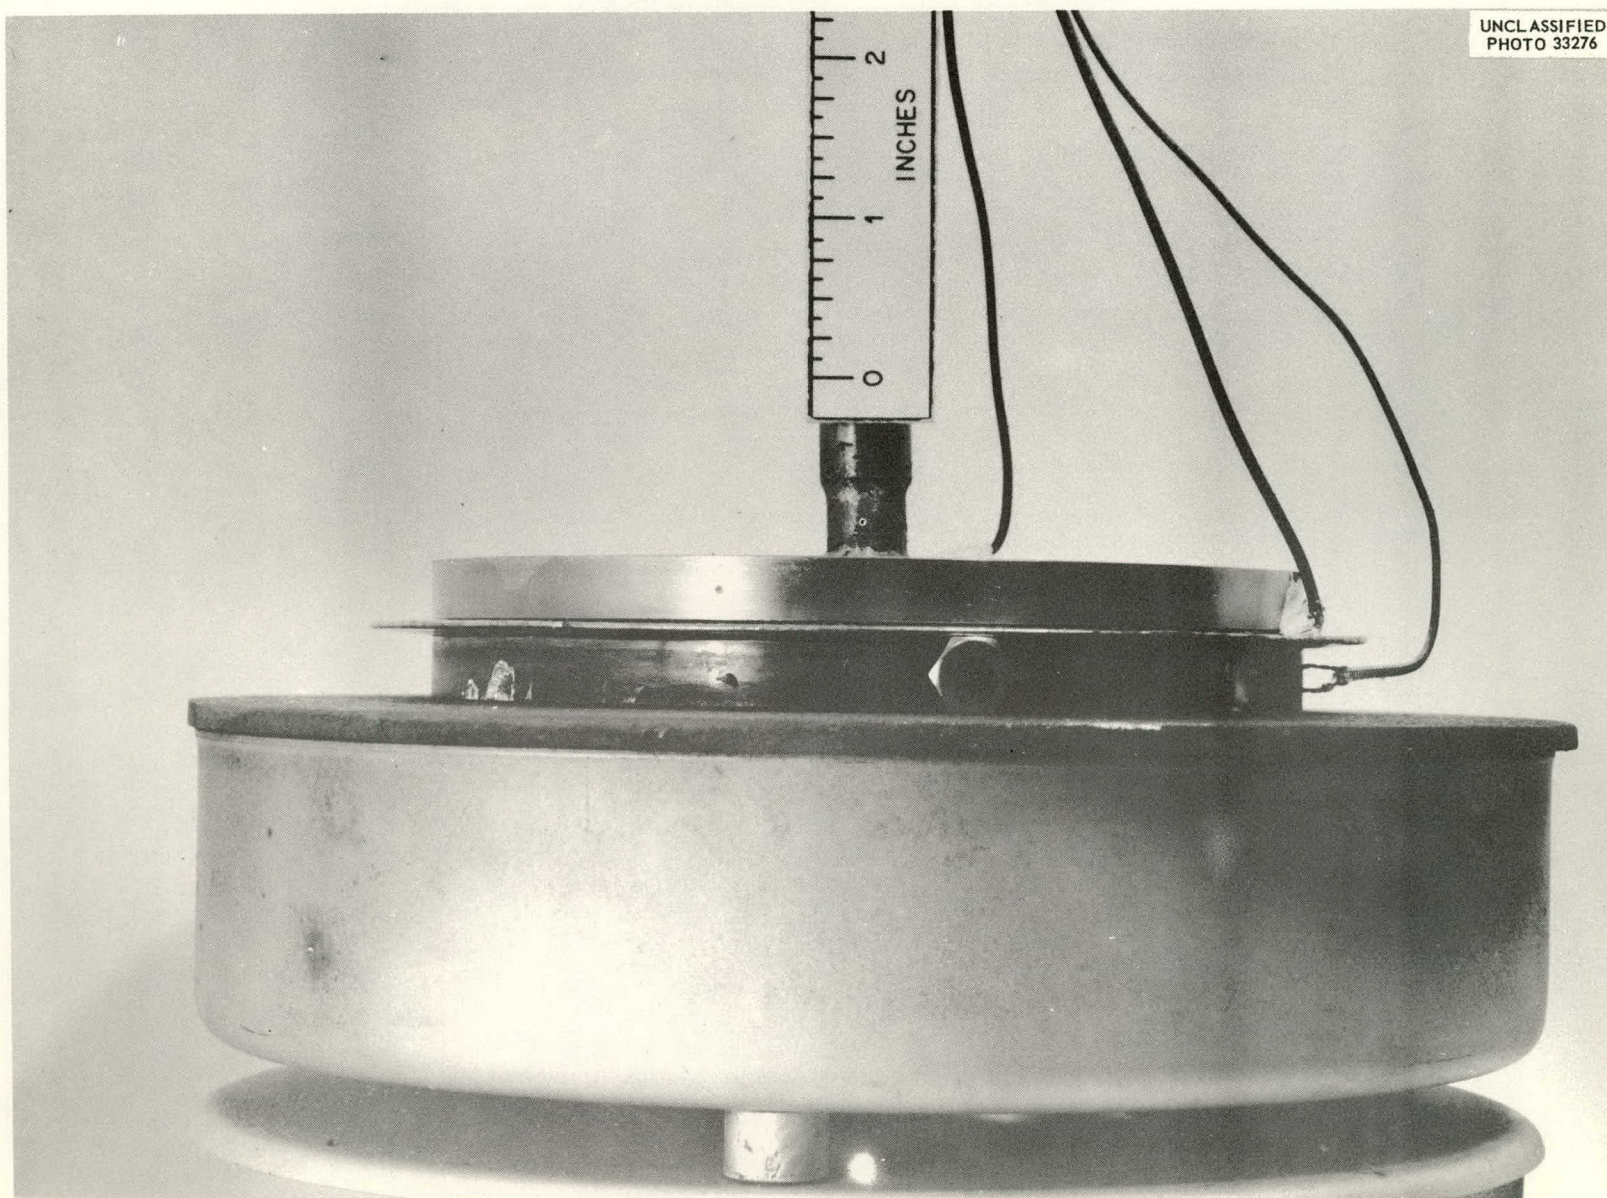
Prototype Outside Seal-Ring Flange Before Heating.
